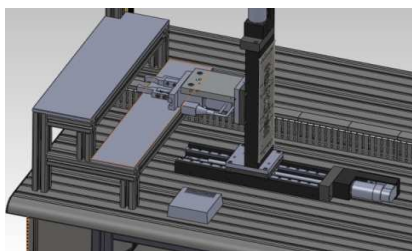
Assembly of the linear positioning axes, highlighting component elements: 1- mechatronic OZ axis; 2- mechatronic OX axis; 3- micro- high-tech grabbing device; 4- linking element
